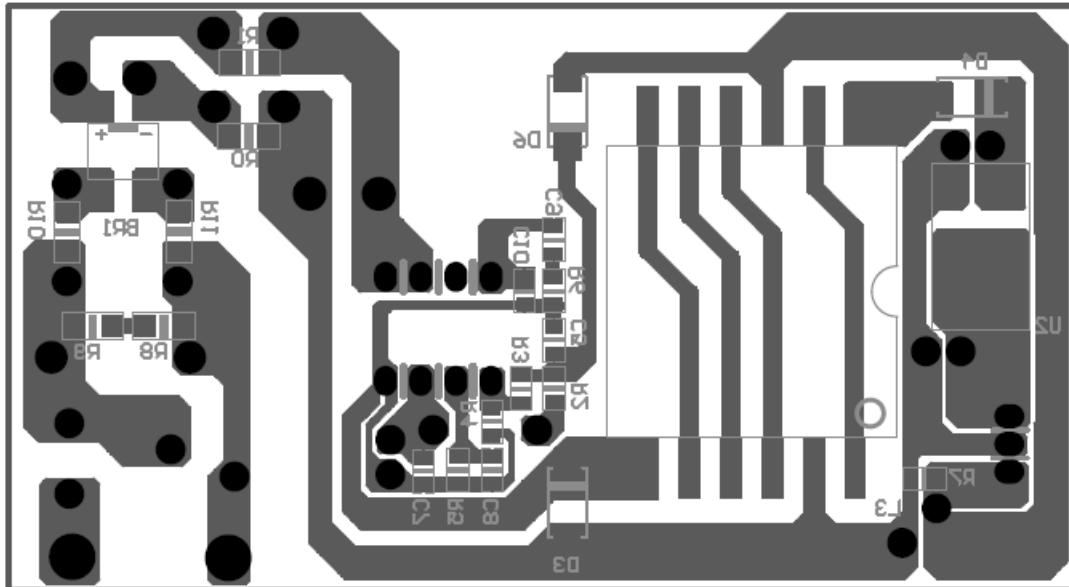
Bottom View (Dimension 76 x 42 [mm²])
